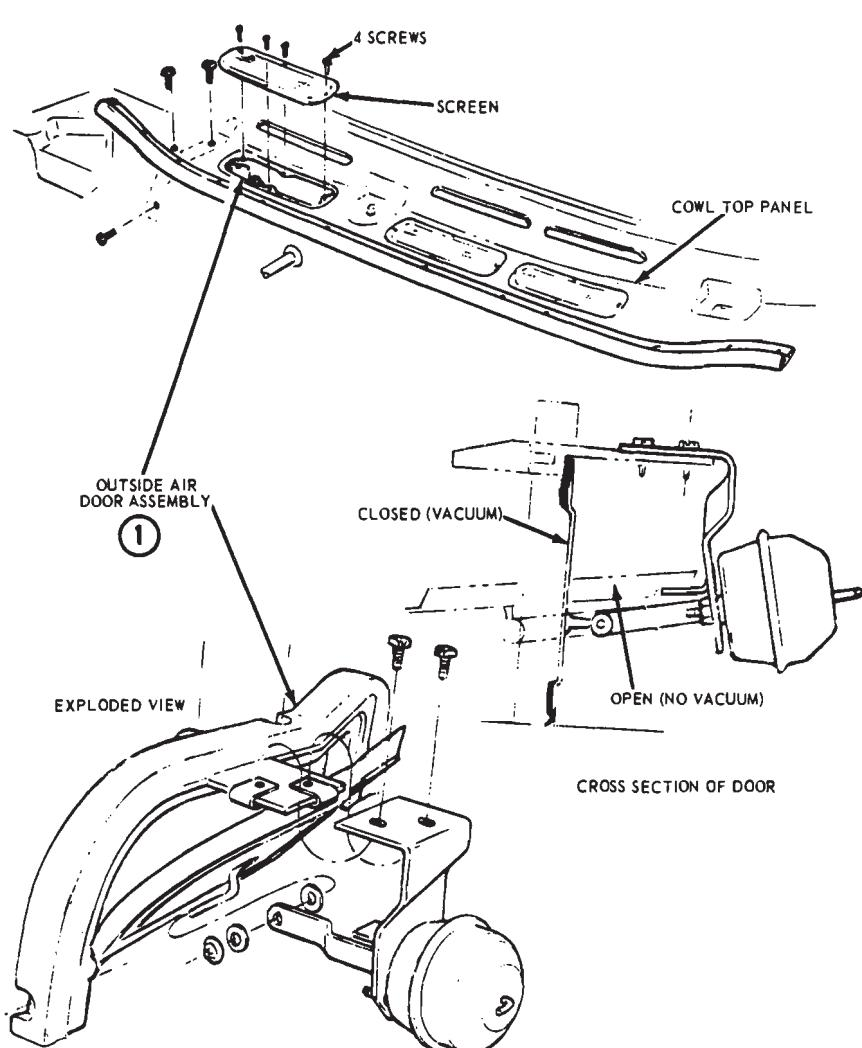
Manual A/C-Heater System Outside Air Door Assembly—Lincoln Continental
